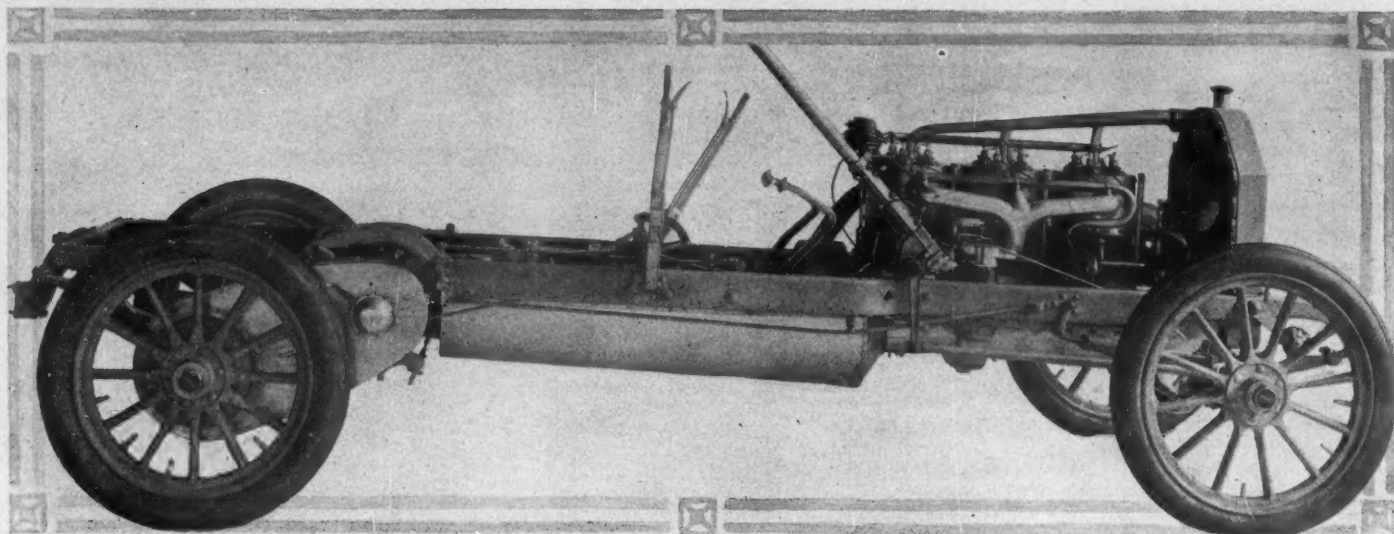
CHADWICK CHAIN-DRIVE CHASSIS WITH SIX-CYLINDER MOTOR
